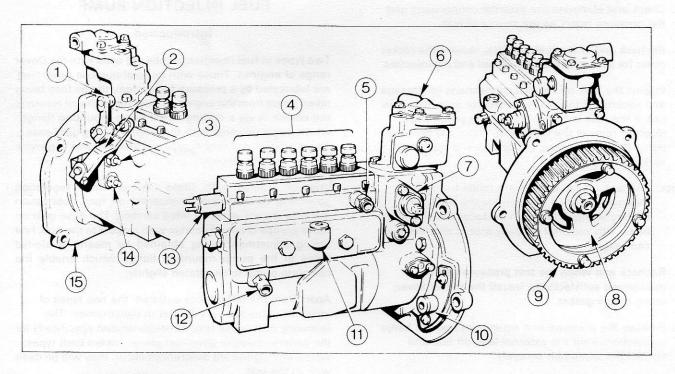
CAV Fuel Injection Pump (Turbocharged General Purpose Governed Type Shown)
